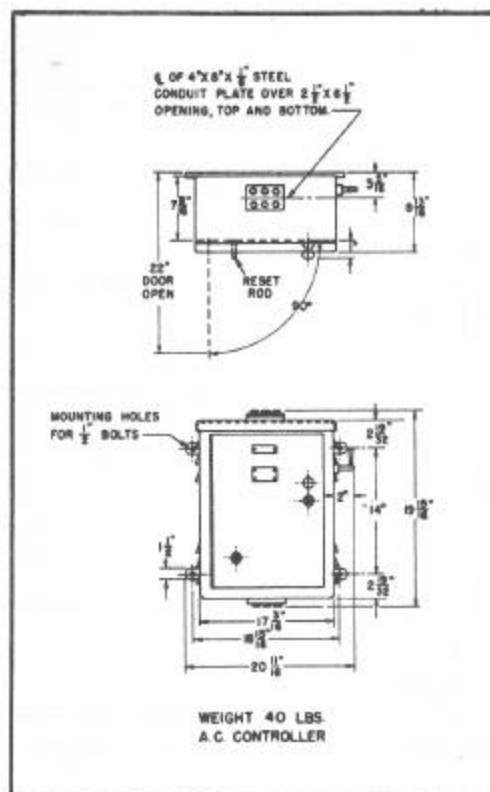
Outline Drawing of A-C Magnetic Controller
